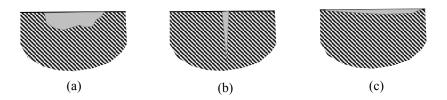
Damages (a) Pit (b) Cracks (c) Worn-out
